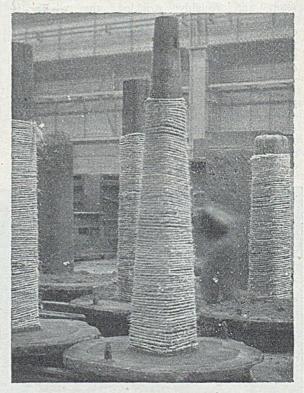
Ingot-mould Core Barrels protected by Woodwool Rope.
